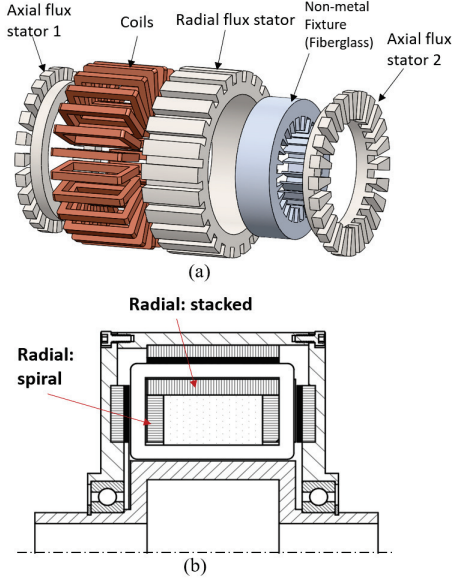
Mechanical design of stator assembly. (a) Explode view of stator assembly. (b) Cross-section view of the full motor assembly showing lamination directions.
